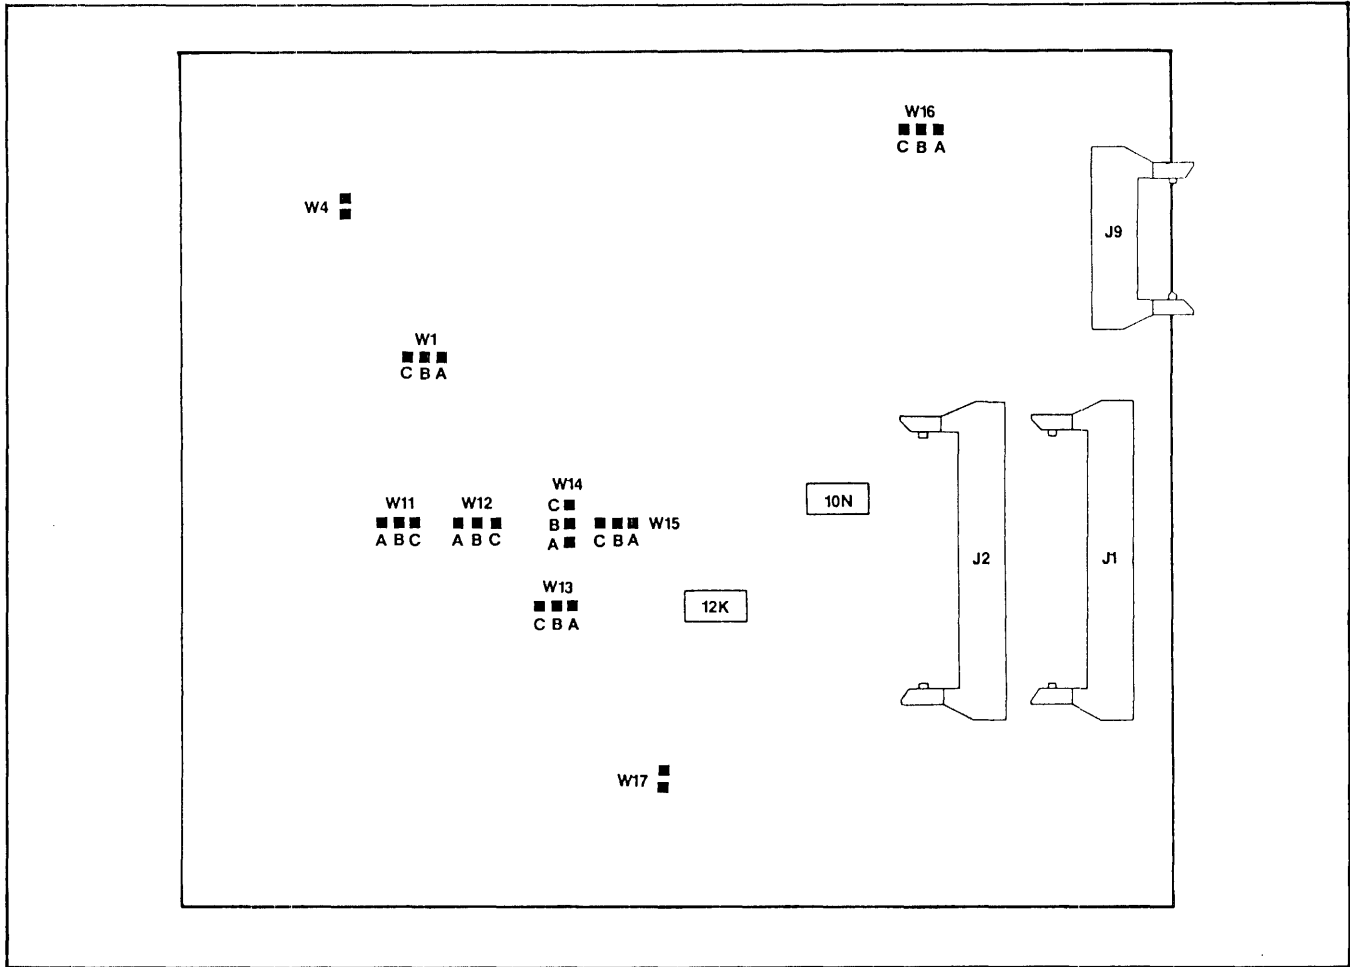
Jumper Locations for PCB Assembly 200403-01/02
